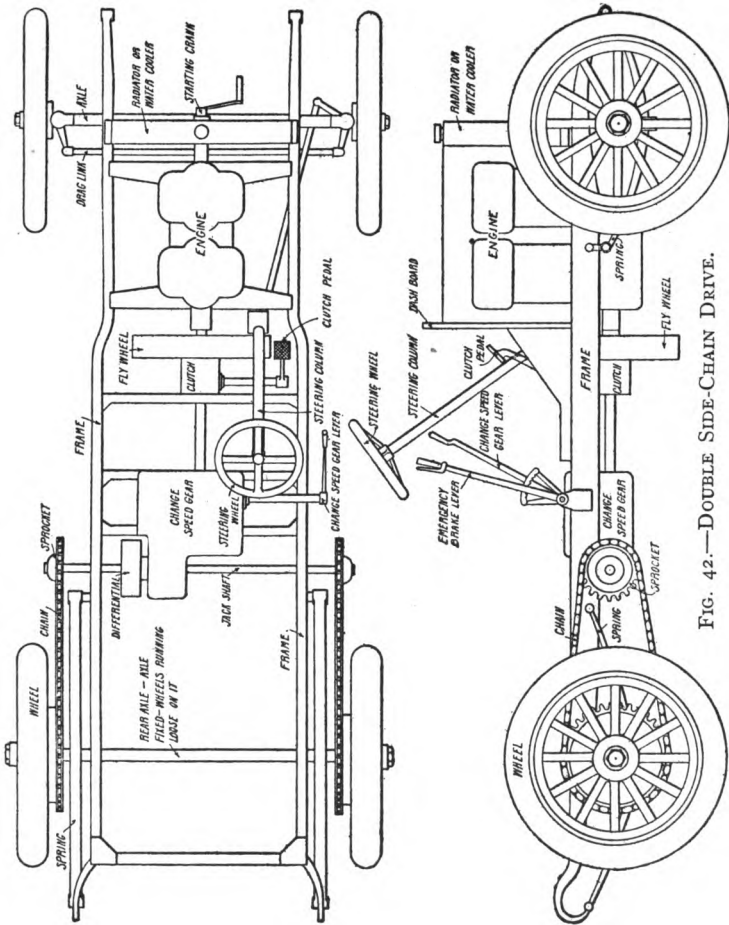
DOUBLE SIDE-CHAIN DRIVE.
